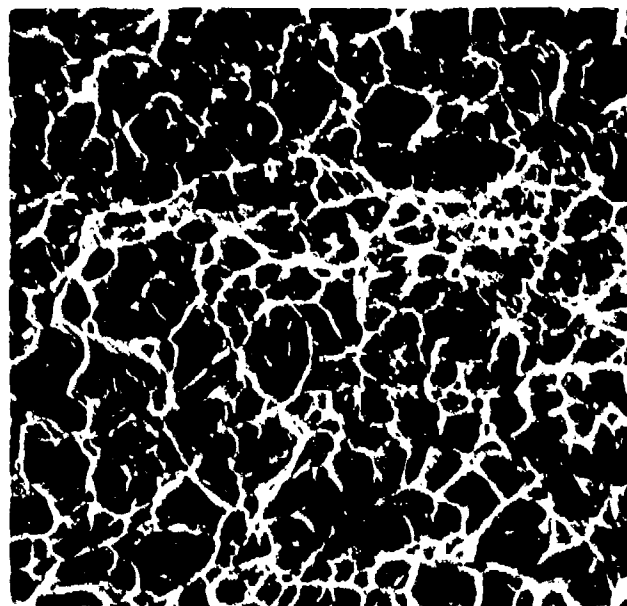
Tensile failure of an A-514 weld material by dimple rupture, 4000x.
